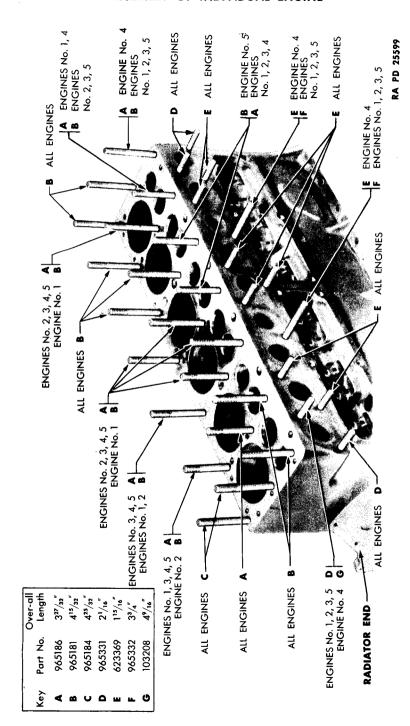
Cylinder Head Stud And Manifold Stud Locations (M4A4)
